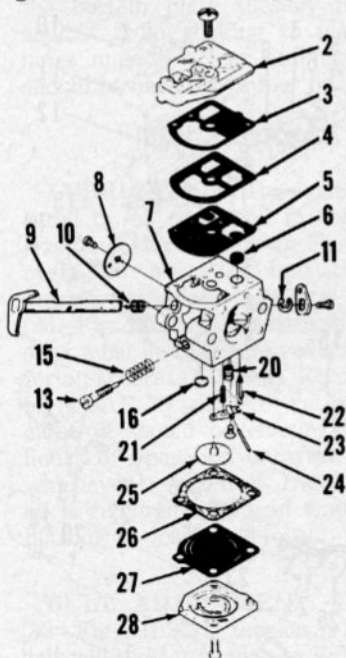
Exploded view of typical Zama carburetor used on ST-120 trimmer.
